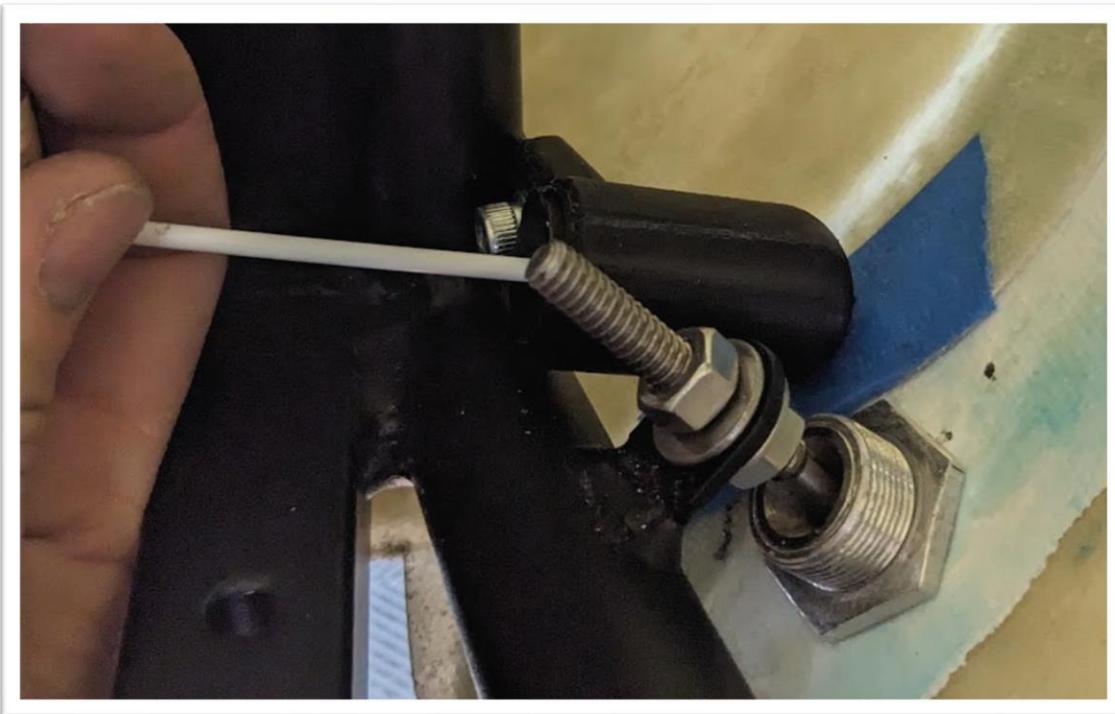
Pen cartridge used to mark holes to drill for mounting on a piece of masking tape
